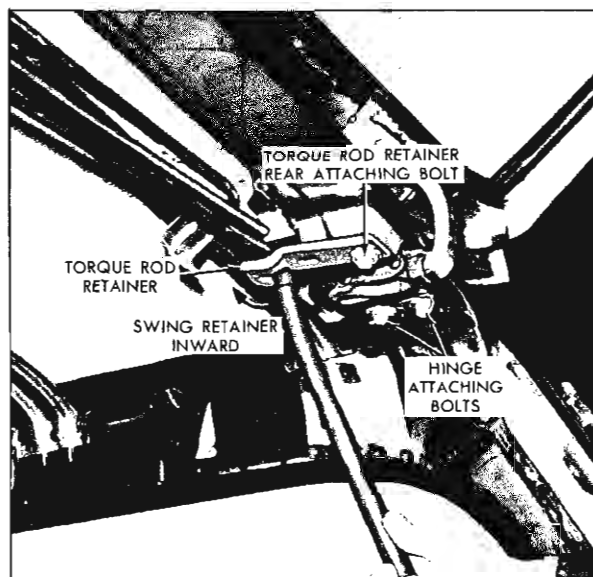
Back Door Hinge and Torque Rod Removal
